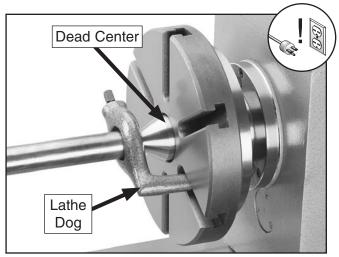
Example of using a dead center with a faceplate and lathe dog.
